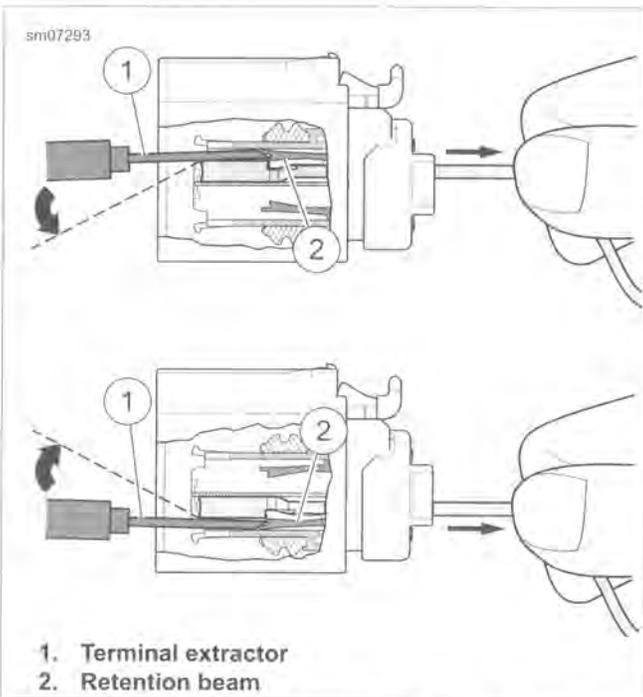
Removing Terminals: Tyco GET 64 Sealed Connector
